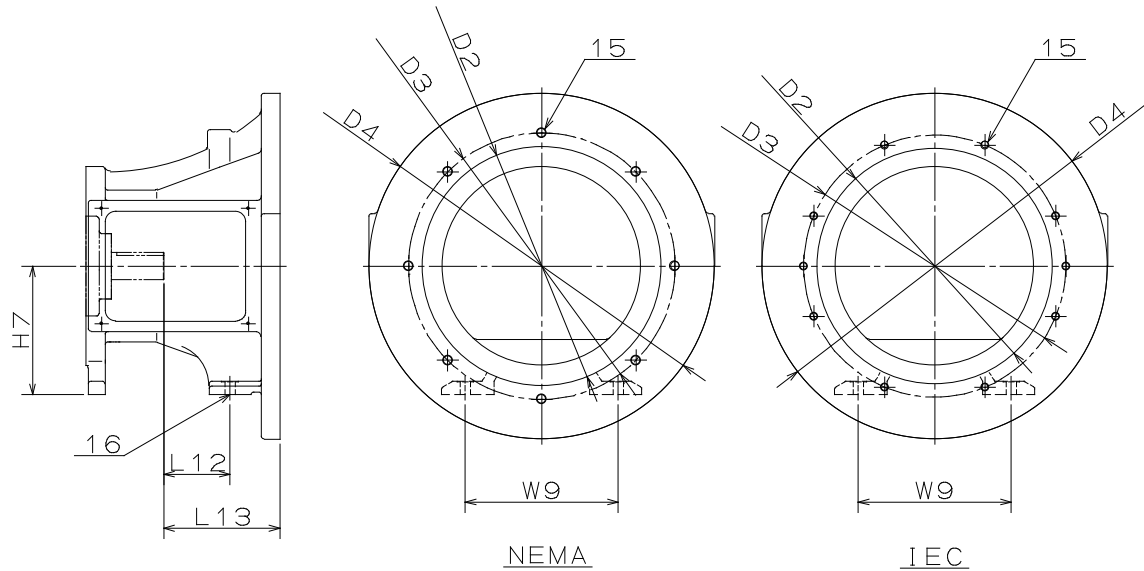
Outer Dimensions of the 170J and 220J-Series (Motor Spacer)
